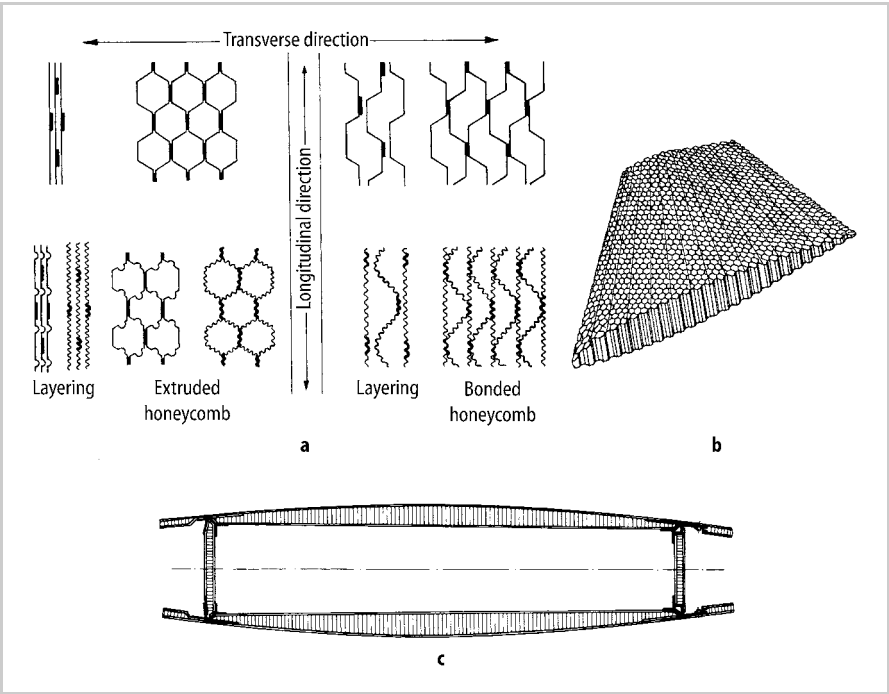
Sandwich construction for lightweight structures [3.30]. a A few honeycomb structures. b Completed honeycomb structure. c Sandwich box girder
